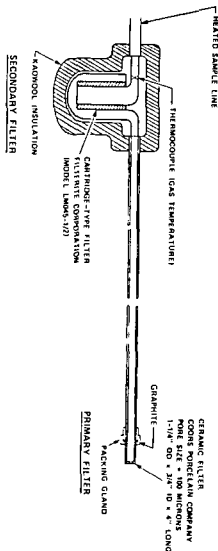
Modified Furnace Gas Outlet Probe-Filter Assembly
